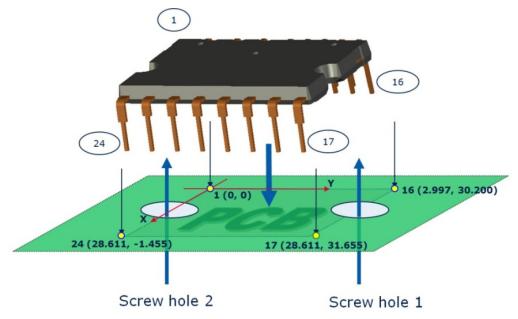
CIPOS™ Mini position on PCB (Unit: [mm])
